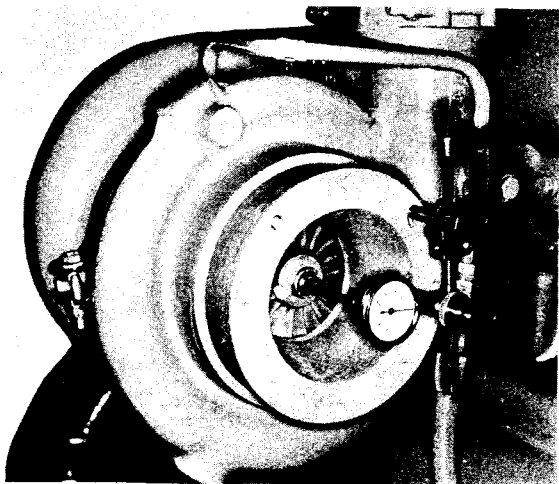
(N11956) Checking turbocharger bearing end clearance
